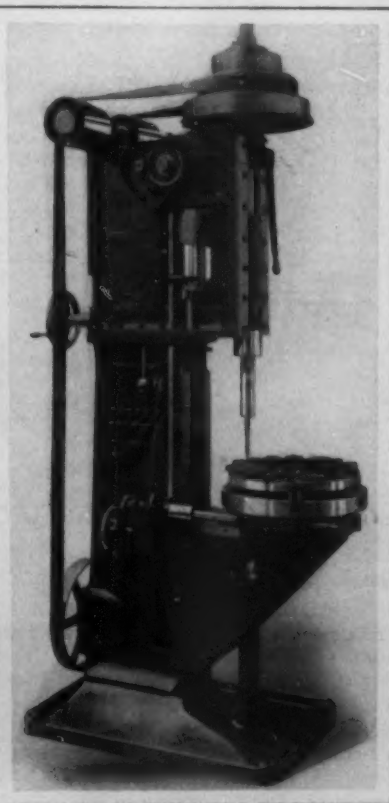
Rear View of a New Automatic Drill with Cam Feed Built by Baker Brothers, Toledo, Ohio
